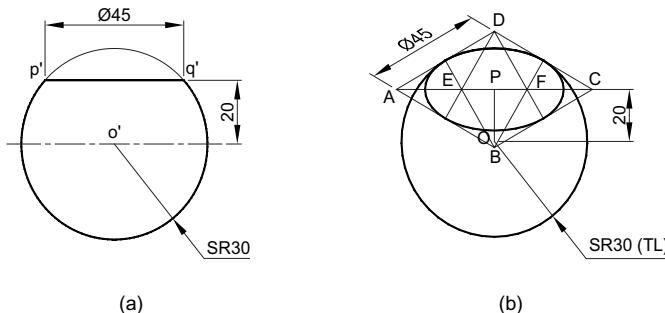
Sphere cut by a horizontal plane (a) Front view (b) Isometric projection
